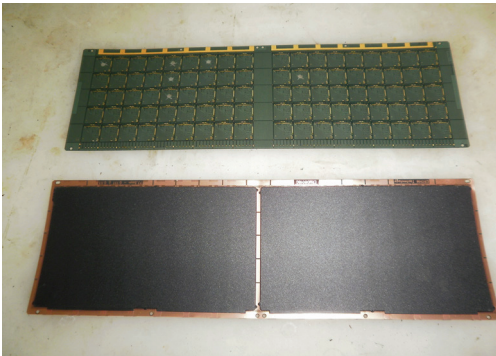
Top : Film schematic, Bottom : PAG workpieces
